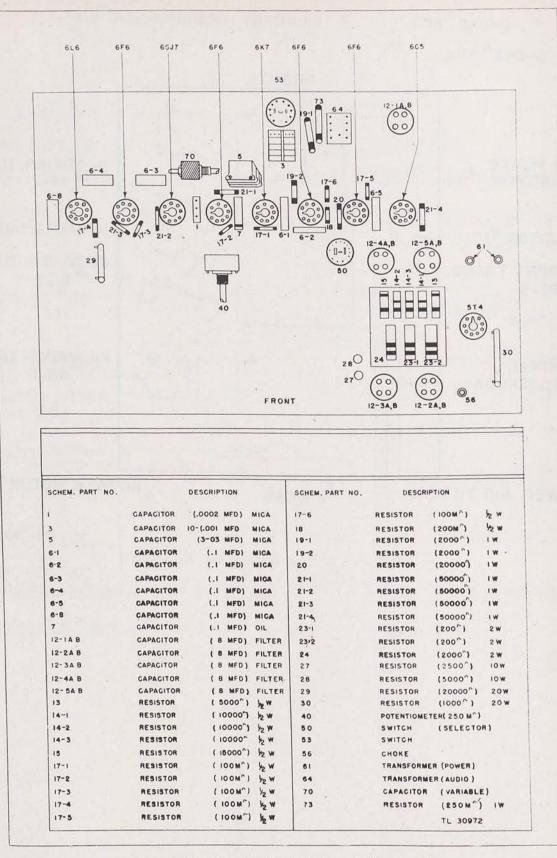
Keyer BC-758-A, location of parts, top shelf.
